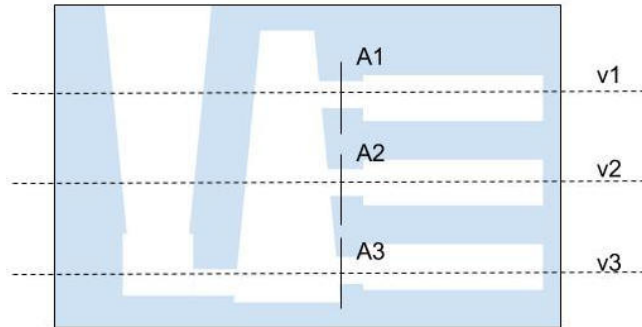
Explicative diagram of the continuity equation for a die casting mold
